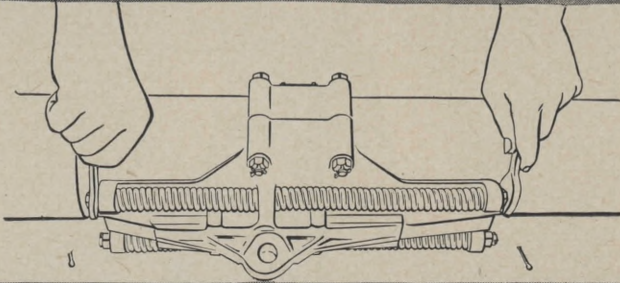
Un-screwing castle nuts on ends of spring guide.
